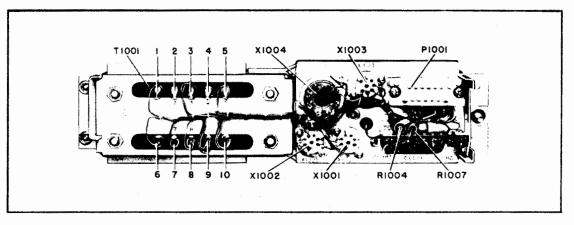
Comparator Power Supply Chassis, Bottom View
